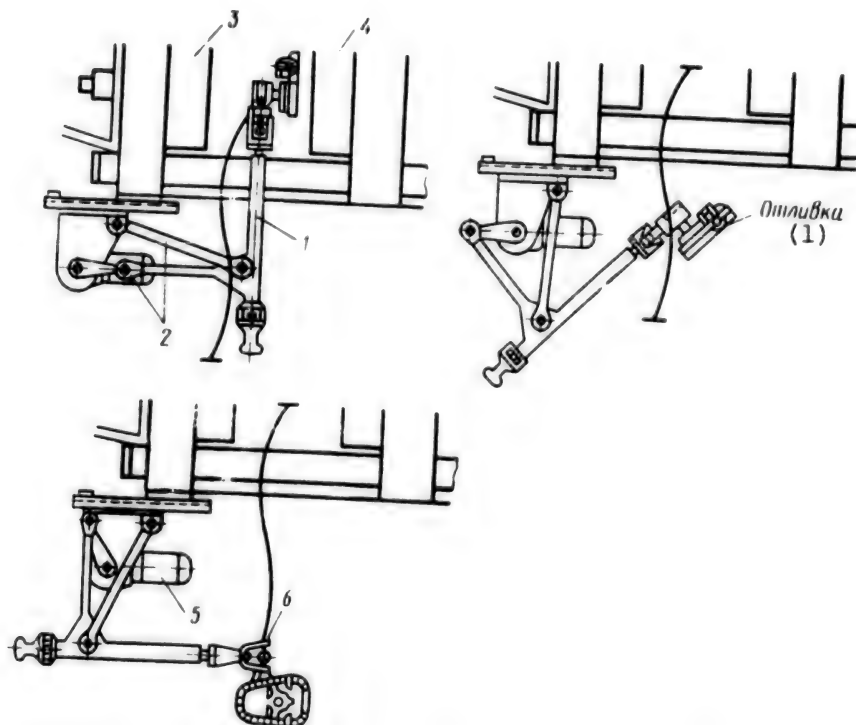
Diagram of Manipulator for Removing Castings From Press Mold
